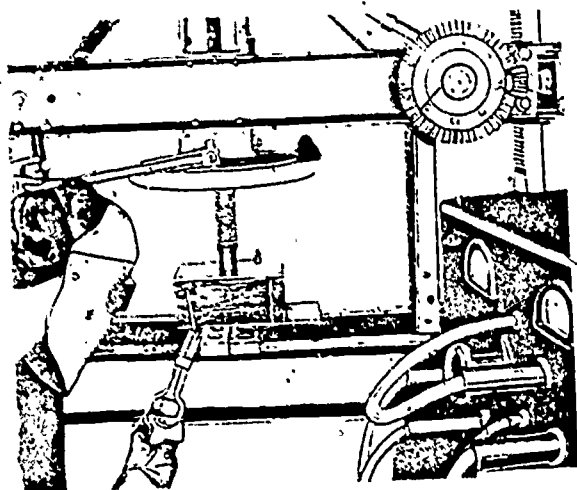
Compressing a stack of pieces in an arbor press and welding them together
